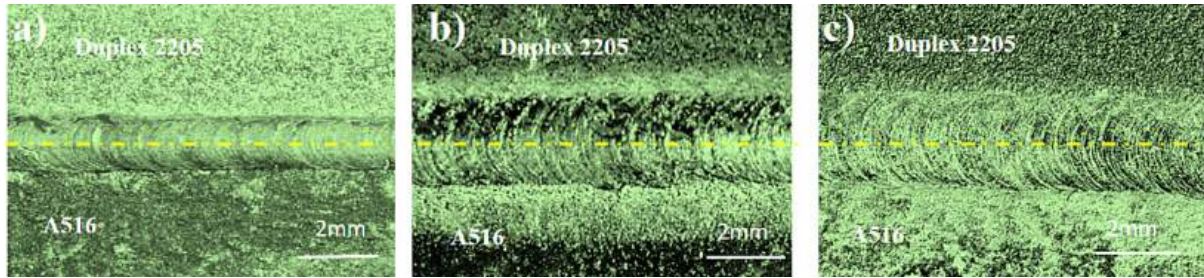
Weld bead shape at welding speed of 4 mm/s. focal distance 0 mm and different laser power of a) 400 W, b) 450 W, and c) 500 W.
